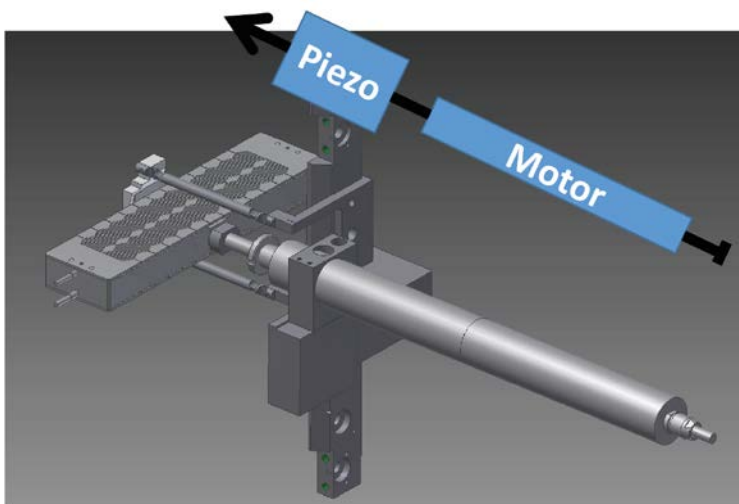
Mechanical construction that combined the range of a geared motor and a piezo stack to allow continuous imaging for large samples.
